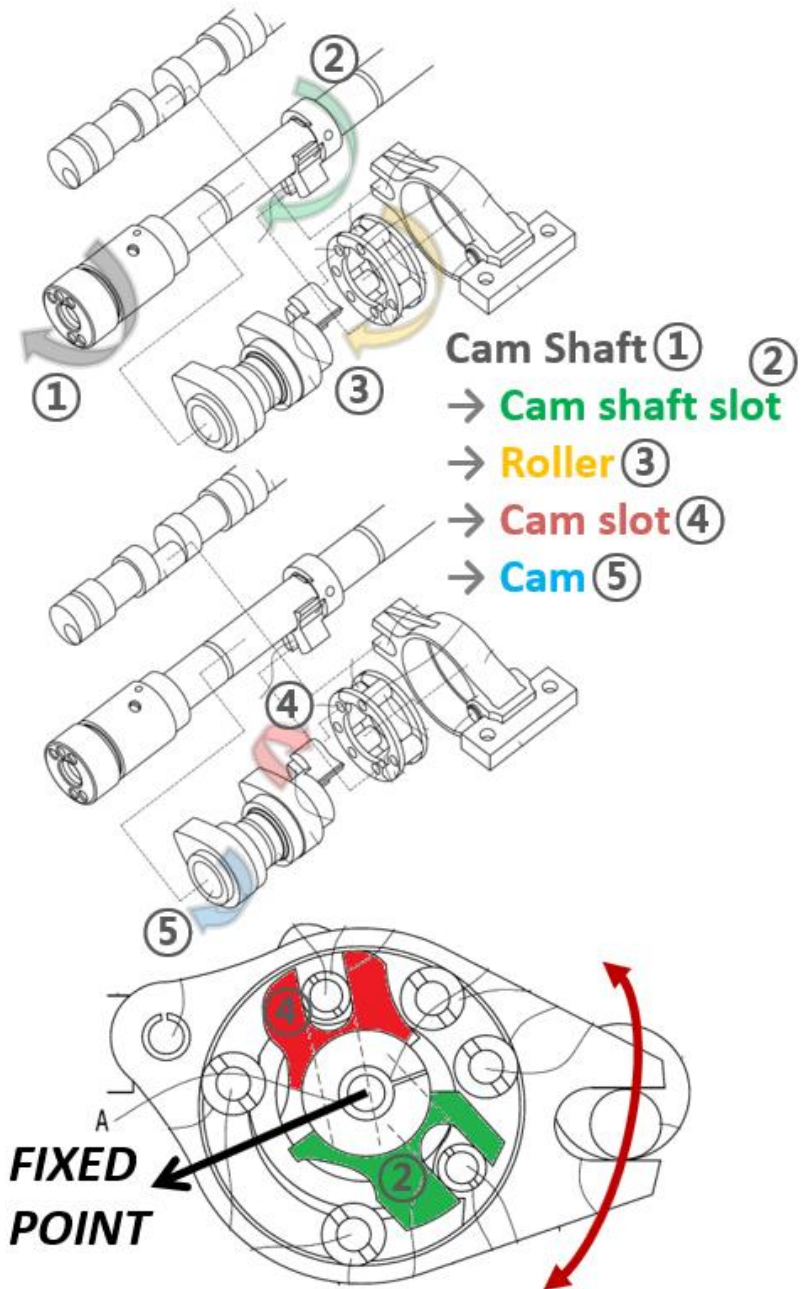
Disassembly and sectional drawing of CVVD [22]
